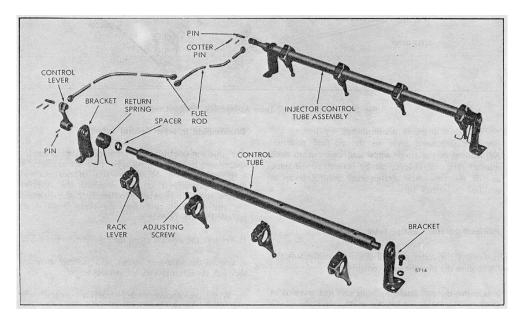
Injector Control Tube Assemblies (Non-Spring Loaded)
